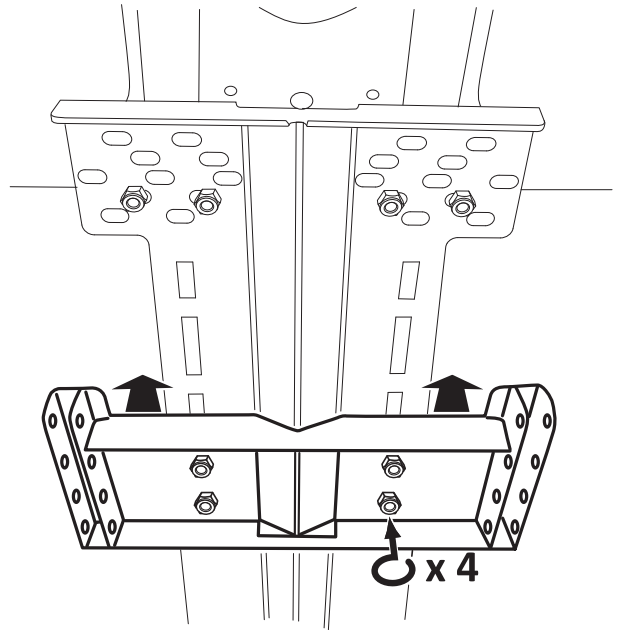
Loosely fasten push tube bracket to spine bracket with carriage bolts and locking nuts.
